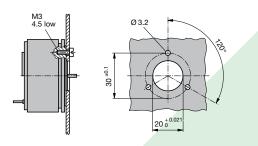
Drilling plan for fixing with 3 cheesehead M3.
